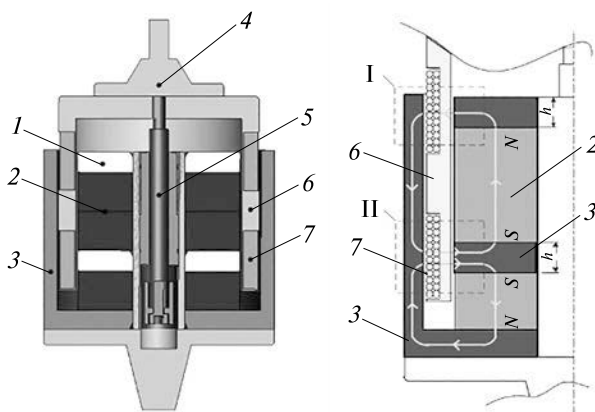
Schematic diagram of solenoid coil motors (VCM) and actuator supports of the WSVI system (1 – soft iron, 2 – magnet, 3 – steel, 4 – mover, 5 – liner bearing, 6 – coil support, 7 – coil)
